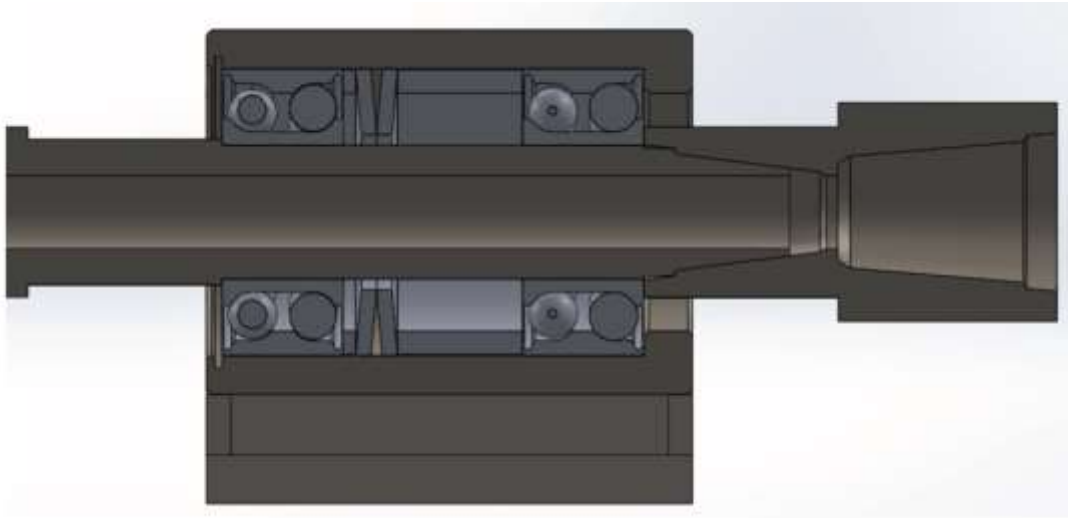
Redesigned bearing assembly for double row angular contact bearings
